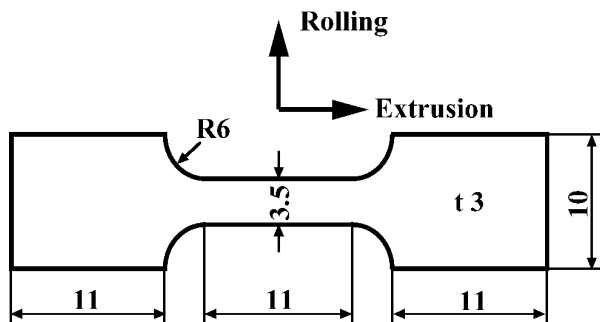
Shape and dimensions of specimens prepared for tensile tests and corrosion tests.
